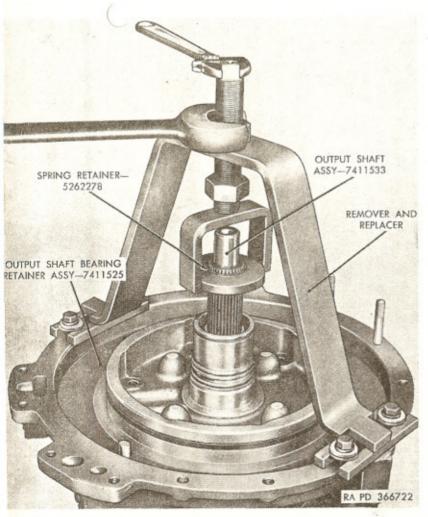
Installing assembled output shaft bearing retainer with remover and replacer—C7950563 (303M).
